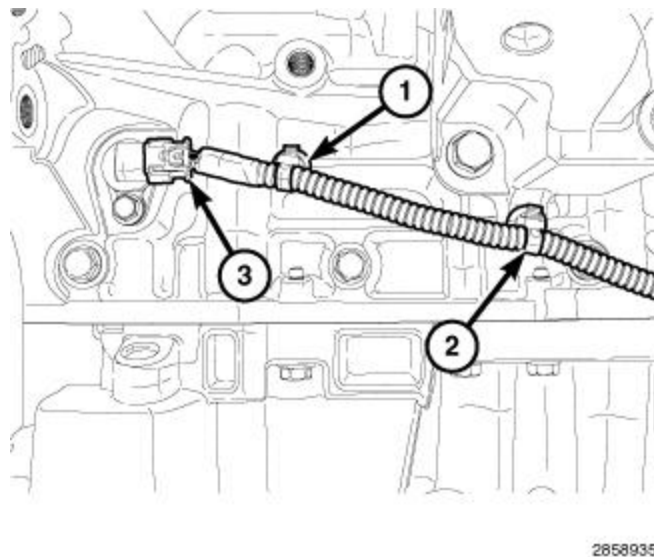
Main Wire Harness Retainers & CKP Sensor
